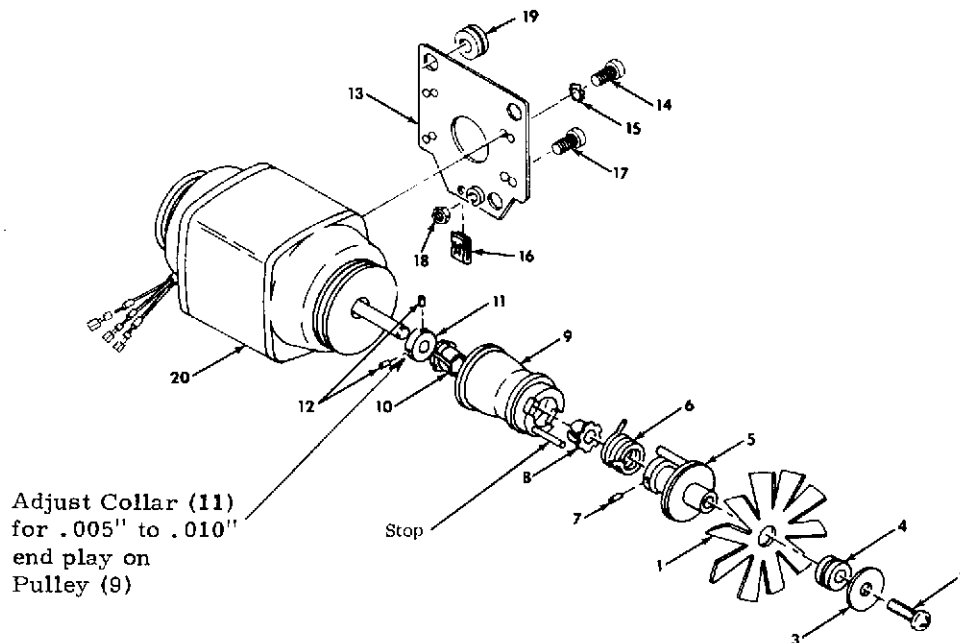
DISASSEMBLY AND REASSEMBLY OF DRIVE UNIT ASSEMBLY.
